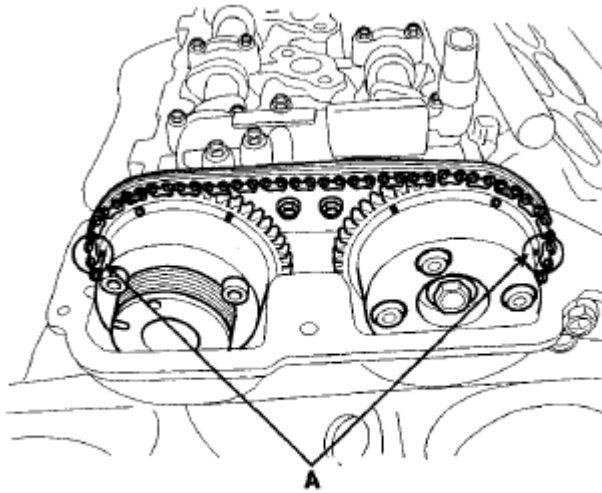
Checking Mark (A) Of Camshaft Timing Sprockets Are In Straight Line On Cylinder Head Surface (1 Of 2)
